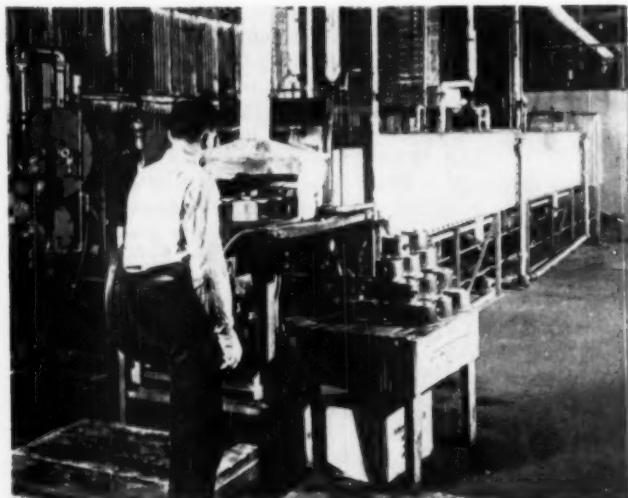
Discharge End of Brazing Furnace With Long Cooling Chamber. Proper atmosphere delivers steel parts with silvery-white surface
